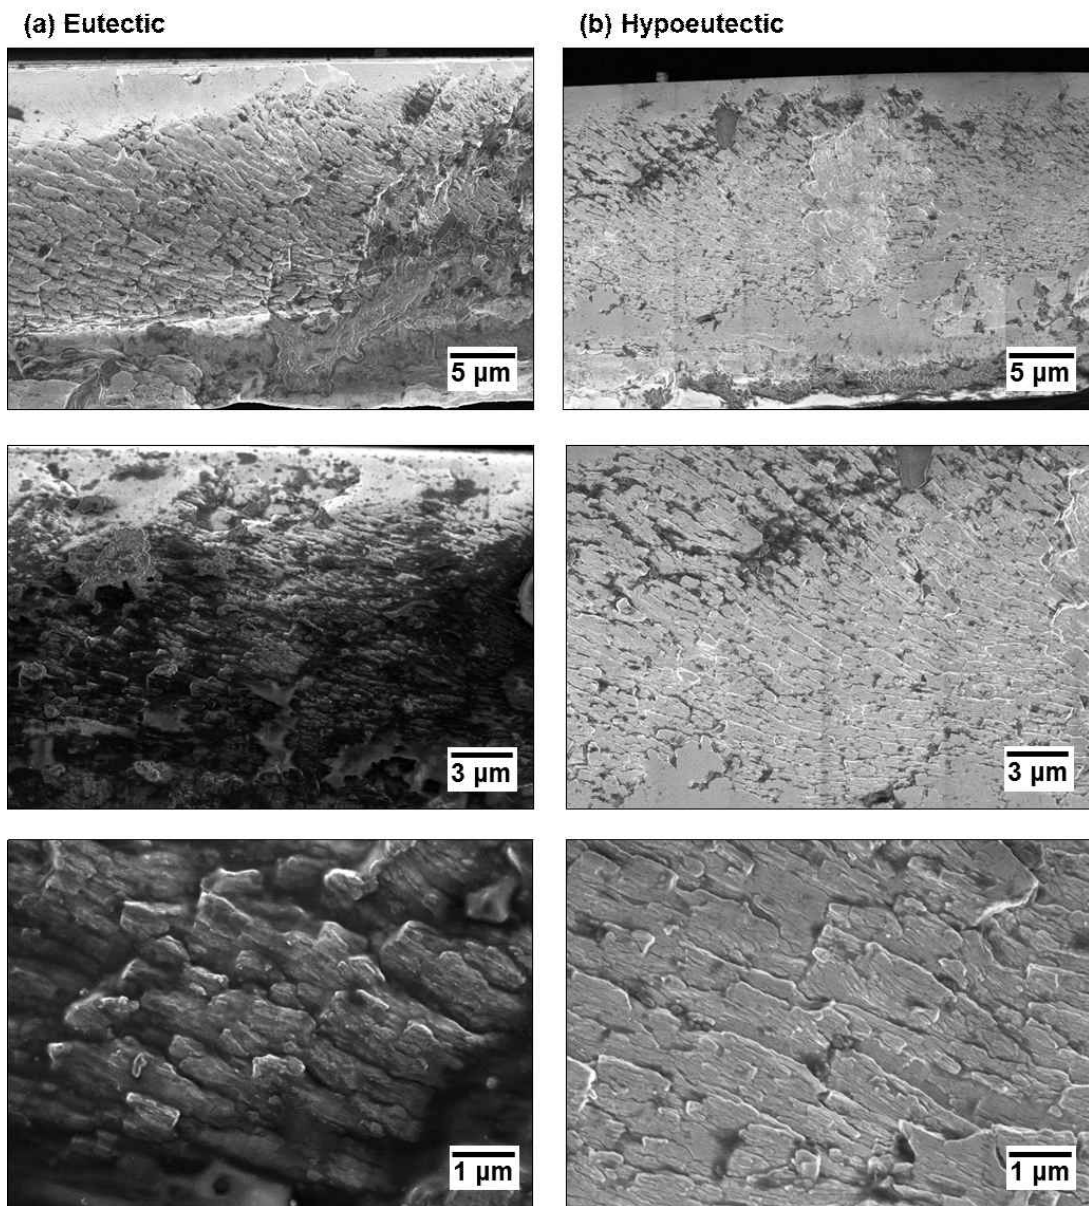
Fracture surface after bending fatigue test. (a) Eutectic composition (b) Hypoeutectic composition
